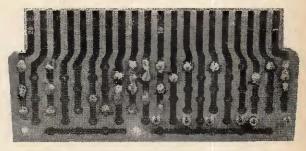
Underside view of the printed wiring board showing the breaks in the copper strips and additional holes to be drilled. The reference numbers on the strips apply to those in Figs. I to 5 inclusive
